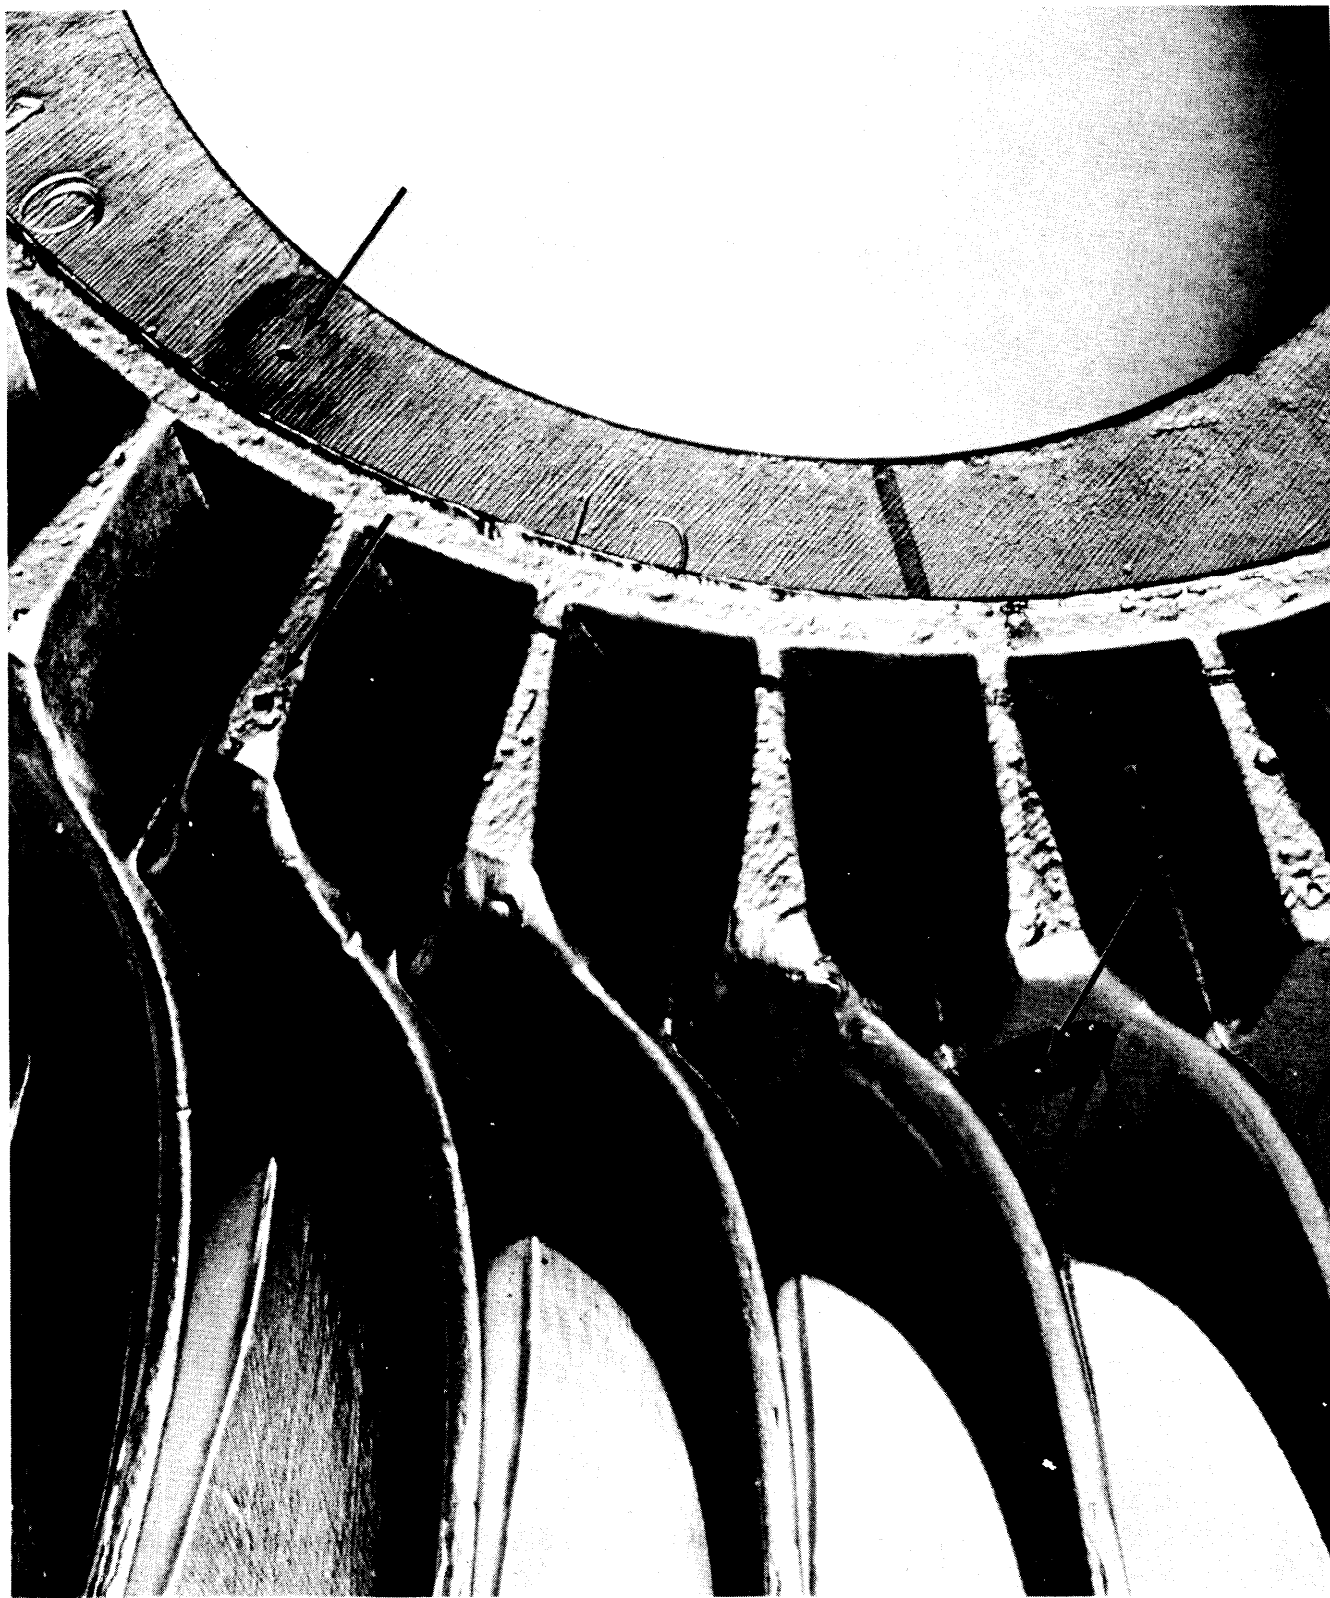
Location of Ultrasonic Test Holes in Forging S/N 10
